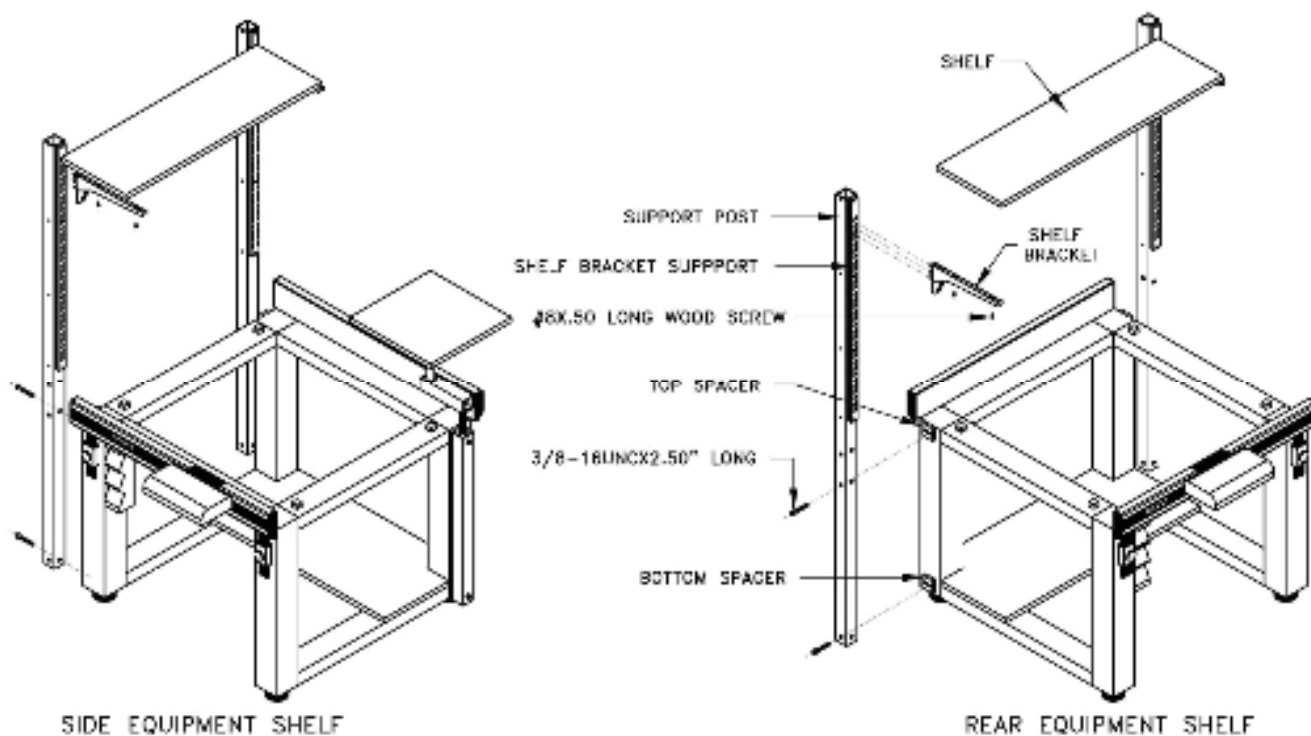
Optional Rear and Side Equipment Shelf Assembly.
